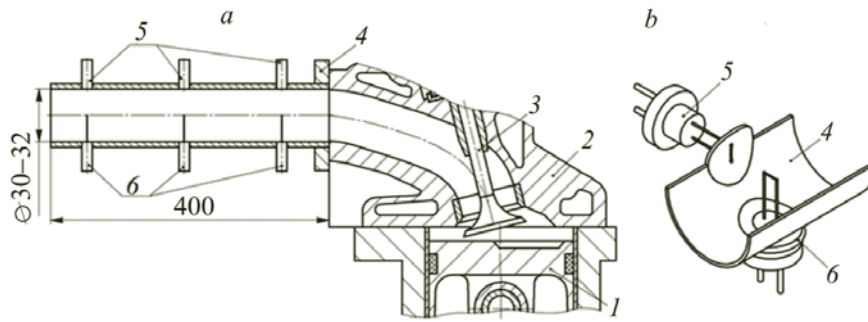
Configuration of the gas-air flow duct of a piston ICE under study (a) and the layout of hot-wire-anemometer sensors in the pipeline (b): 1) piston; 2) integral cylinder head; 3) intake or exhaust valve; 4) pipeline under study; 5) hot-wire-anemometer sensor to determine the local heat-transfer coefficient; 6) hot-wire-anemometer sensor to determine the local gas-flow velocity. The dimensions are in mm.
